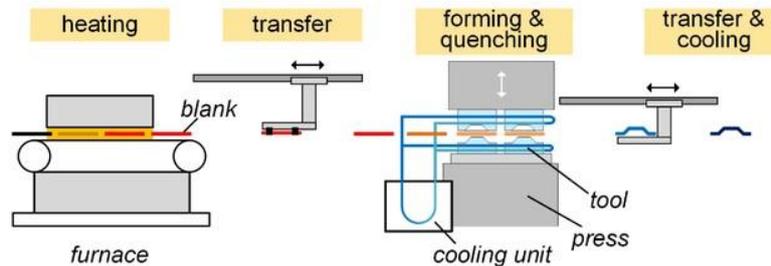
A quick overview of some steps of direct press hardening process, including the forming (or “hot stamping”) step and the die quenching step.
